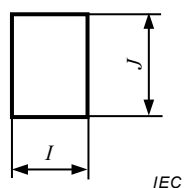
Fixture cut-out information for LC duplex (rectangular flange) adaptor
